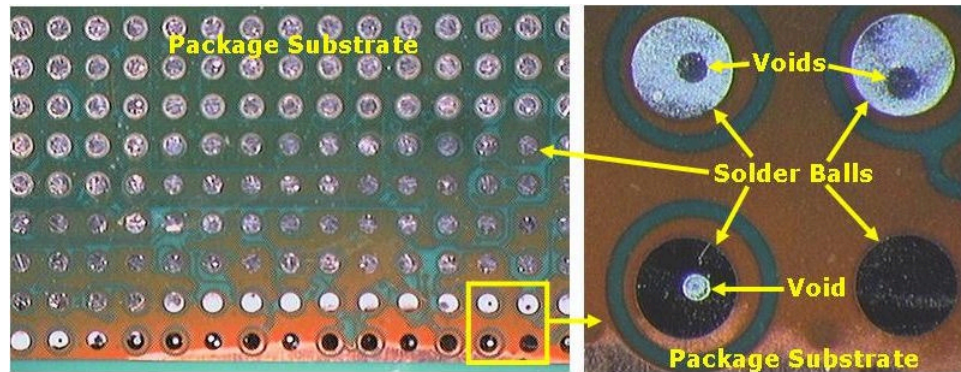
Higher Magnification Views of Package Warpage Effects on Horizontal Grinding and Polishing Near the Package Edge.
